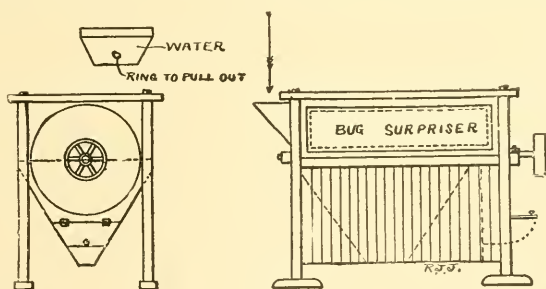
Machine for destruction of insects in mills (from *American Miller*).
